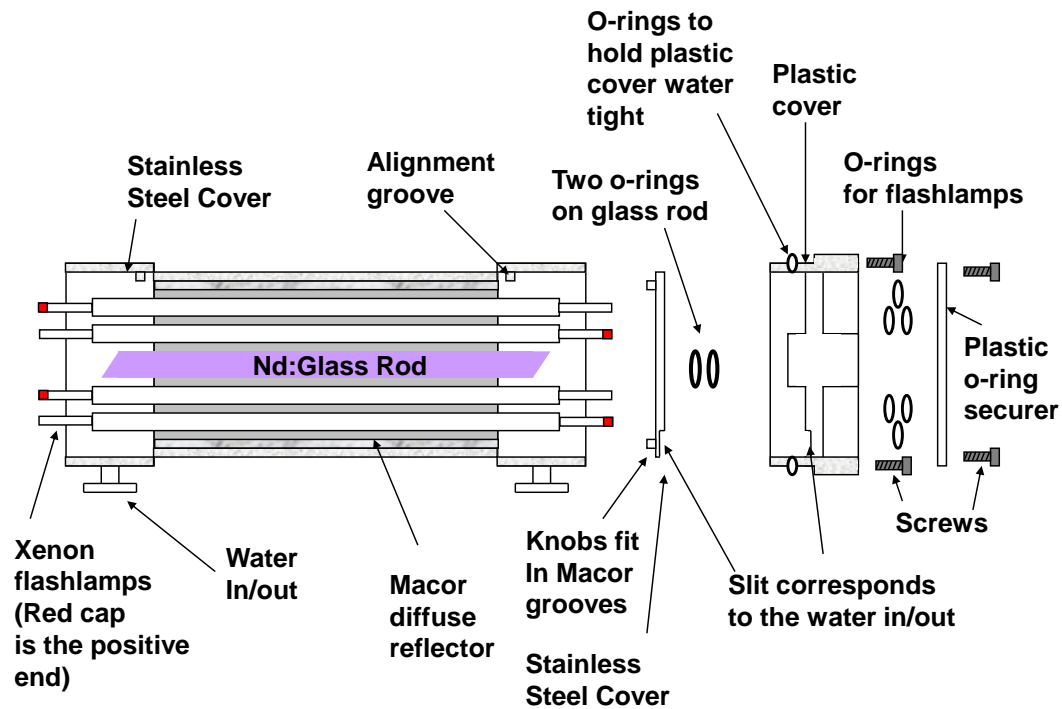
Side view assembly diagram of the glass rod and flashlamp configuration in the laser head.
